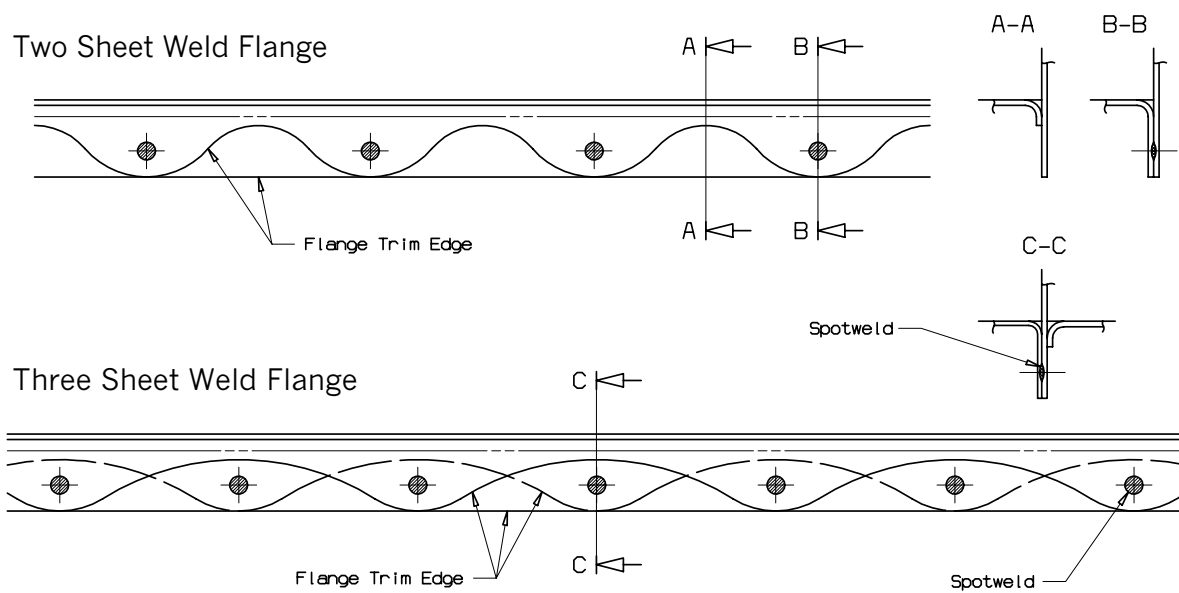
Layout of 2 and 3 Sheet Weld Flanges
